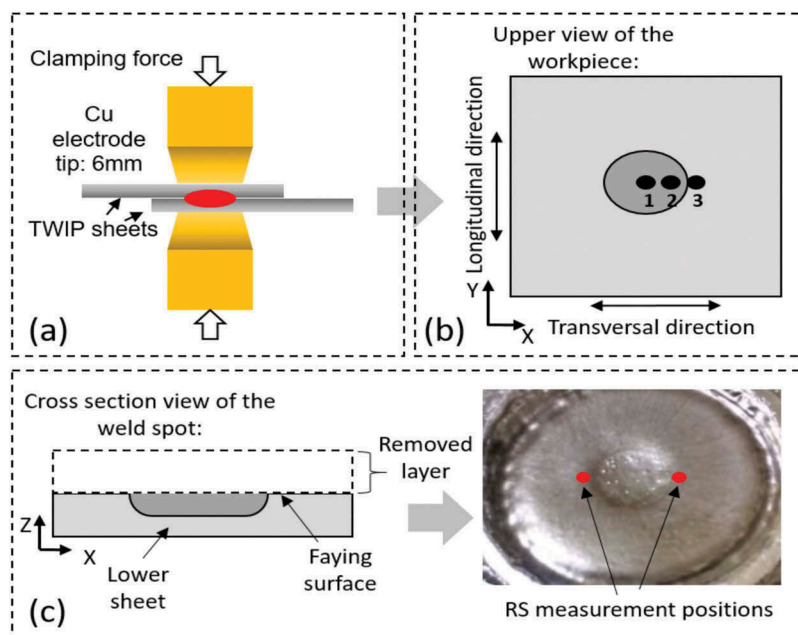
Schematic diagram of: (a) resistance spot welding setup, (b) RS measurement positions on the surface and (c) measurement positions at the core of the weld spots.
